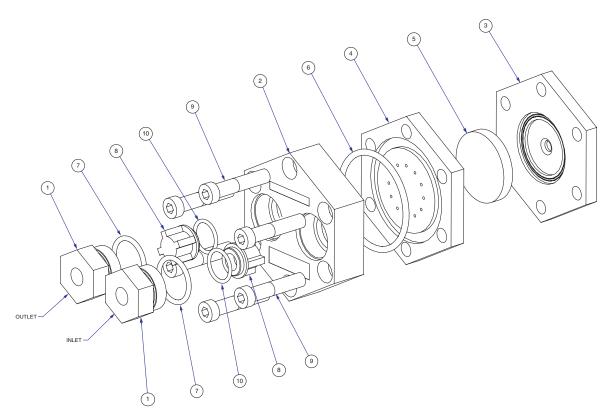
CDS 4.6/4.8 Pump Assembly C-5493 Rev A
